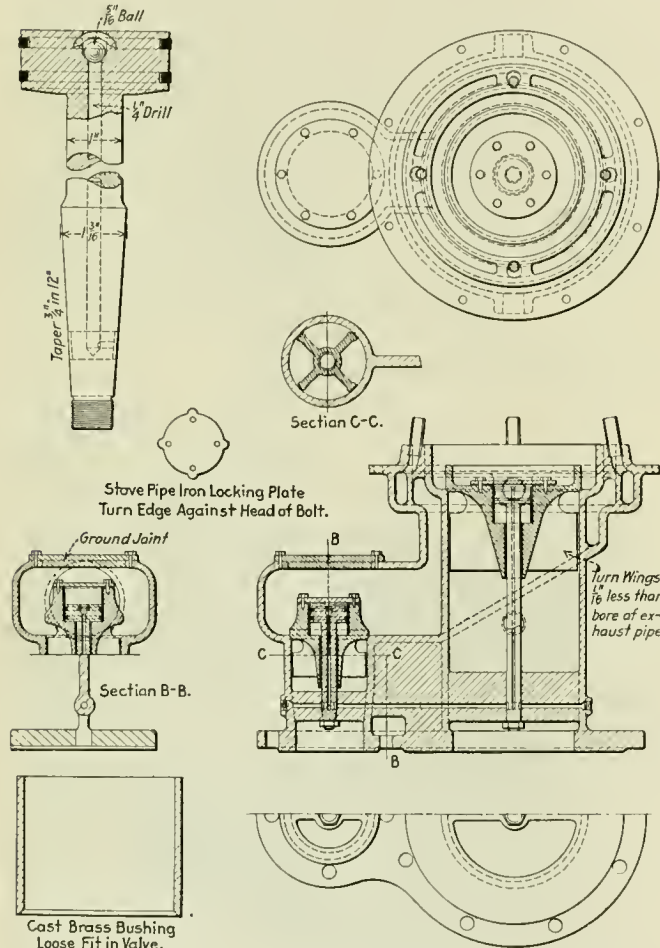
Osmer Exhaust Pipe Adapted to Mallet Locomotive
